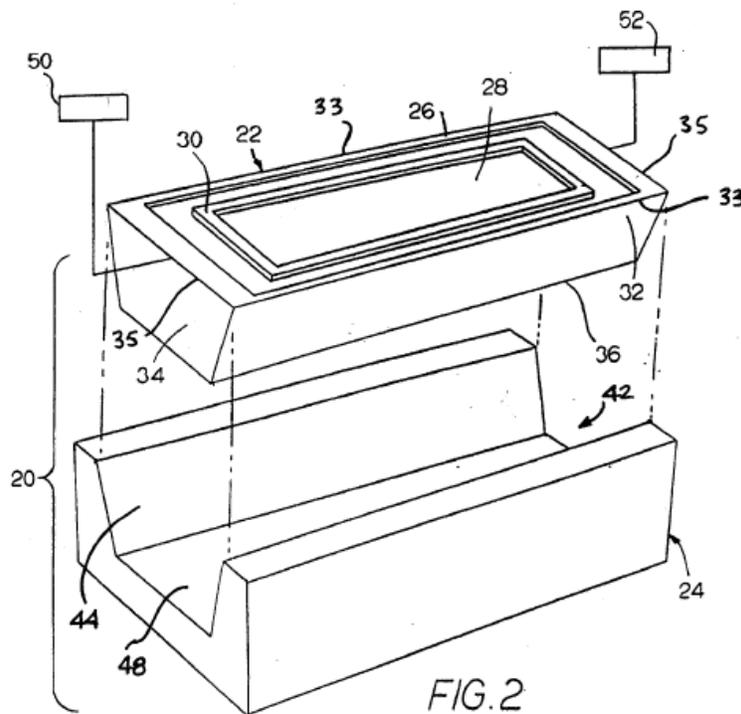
shows an IMC evaporator boat assembly where the evaporator boat 22 is “exploded away” from the thermal insulation package 24. *Id.* ¶ 6. The figure additionally shows heaters 50, 52 “electrically connected to each end wall 34.” *Id.* ¶ 12.
